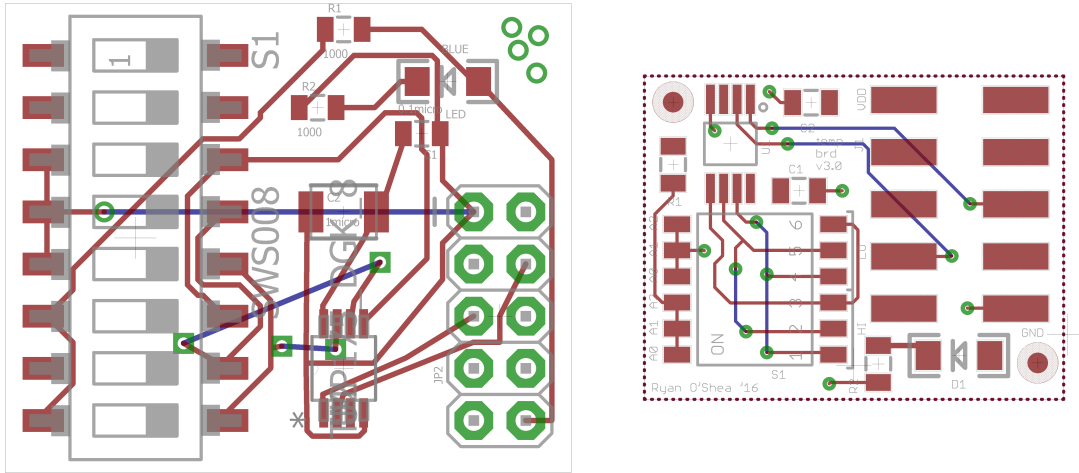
De Groot PCB (left) vs. miniaturized PCB (right)
